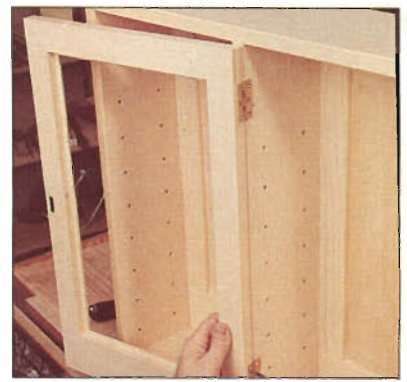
Photo S: Cut gains and attach hinges to door first, then position door flush with back edge of case chamfer to lay out hinge gains on the case divider.
